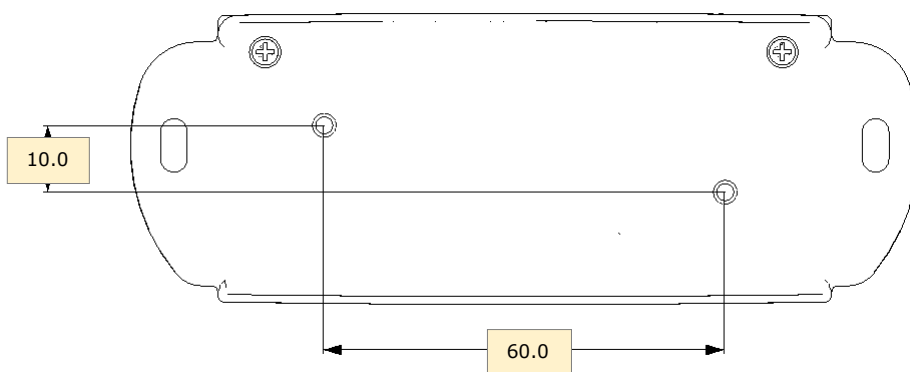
LDSBus HVT-Junction Dimension – Bottom View
